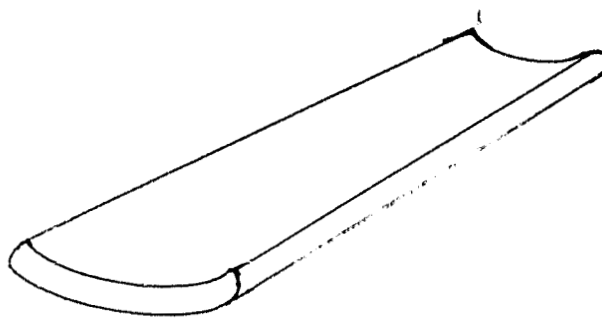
A - COIL-FORM SHAPED HEAT PIPE
